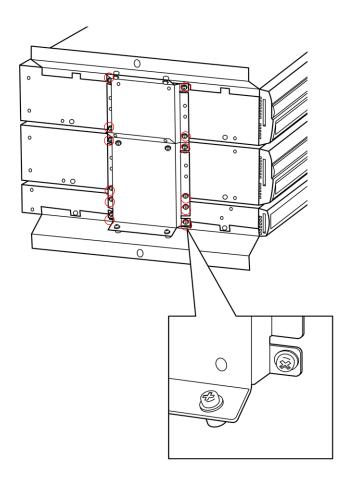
Attach Stand Mount Brackets to Chassis with Screws (CHS1U-US+CHS2U-USx2 Configuration)
